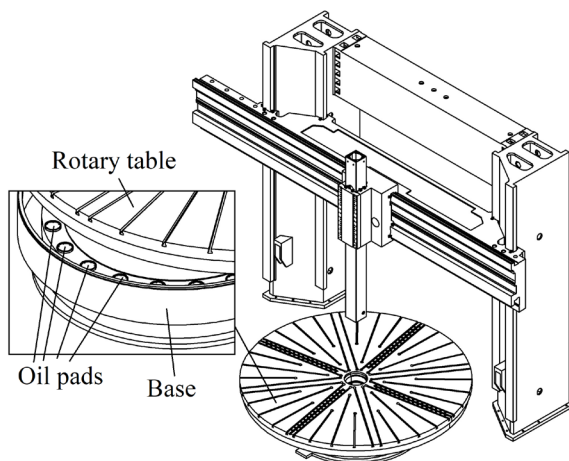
Model of hydrostatic turntable on heavy machine tools
